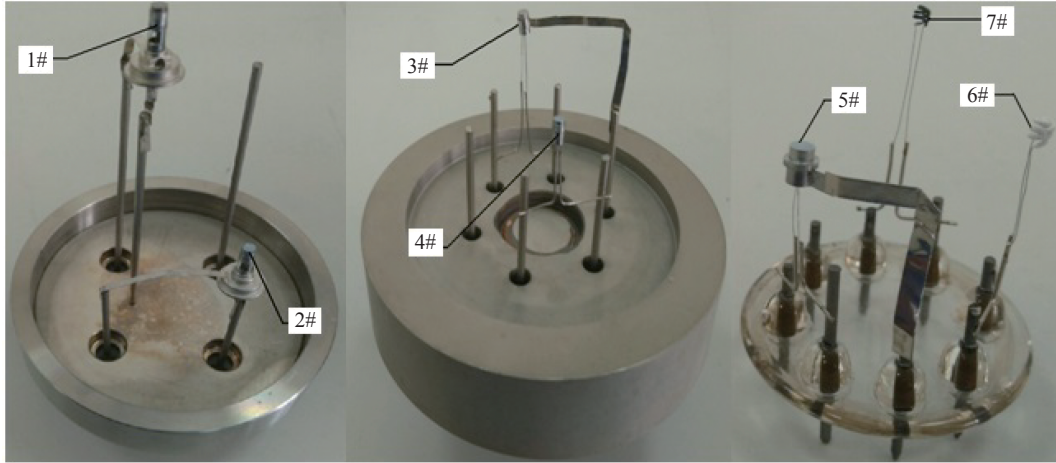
Samples (1#~7#) of cathode-heater assembly
